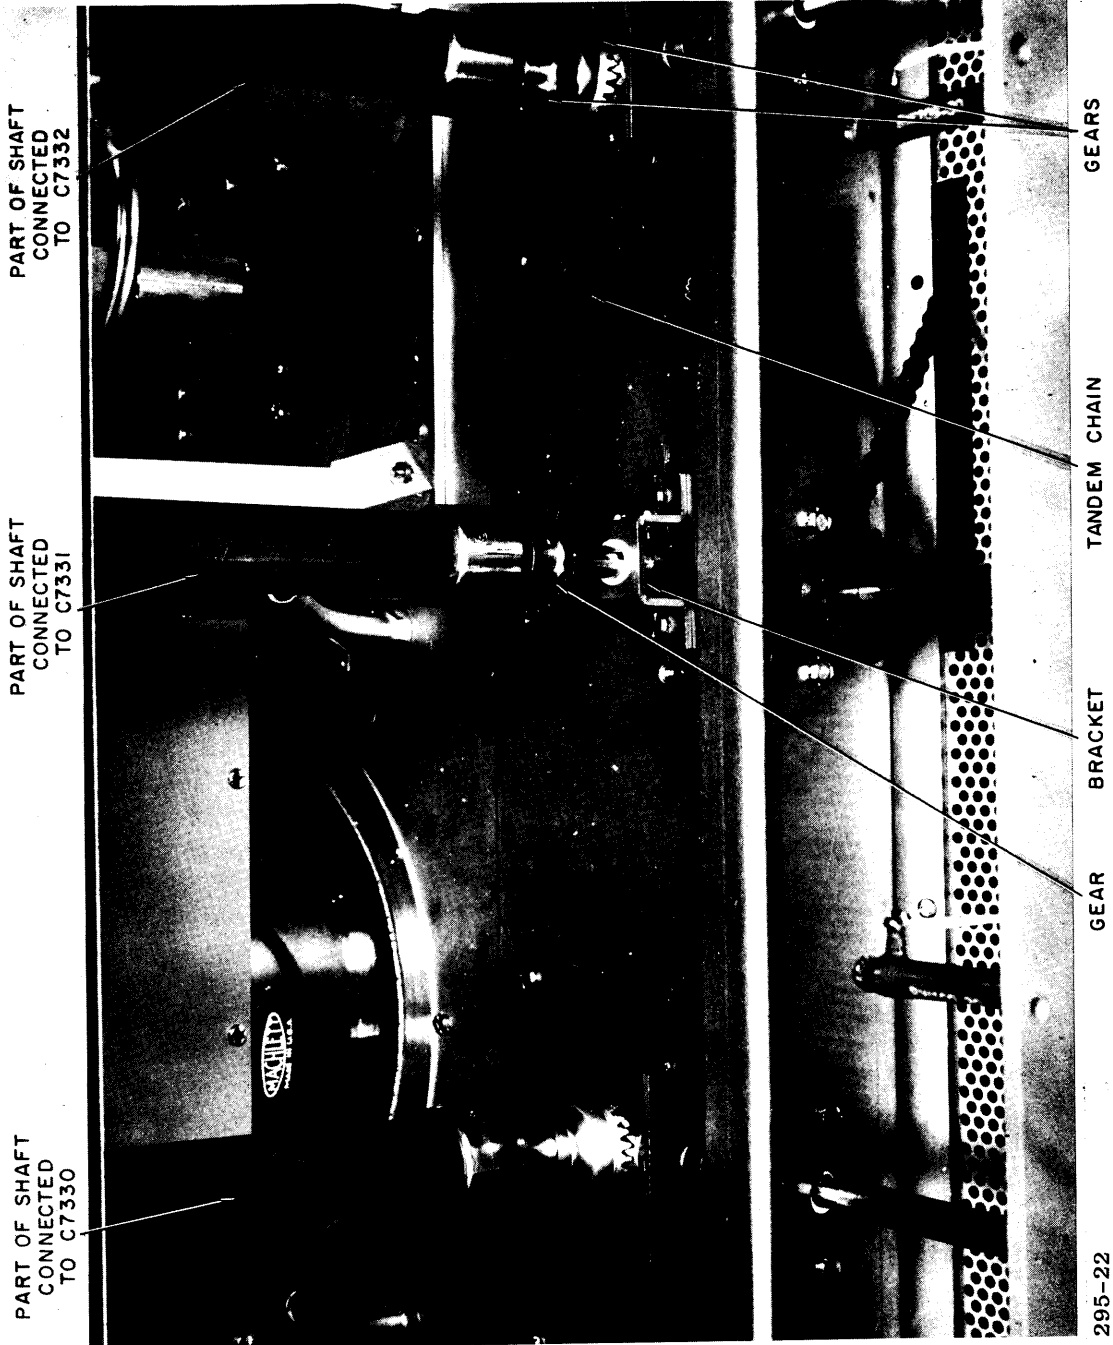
Third Frame Pa Compartment, Front Views (sheet 3 of 3).
